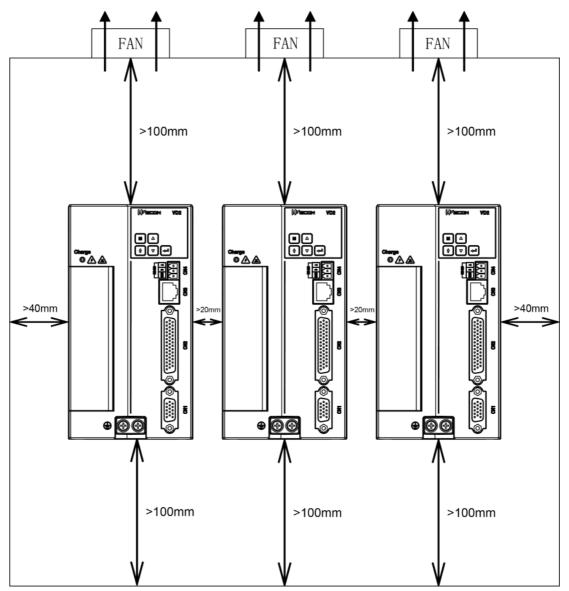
Parallel installation dimensions of multiple VD2B drives
